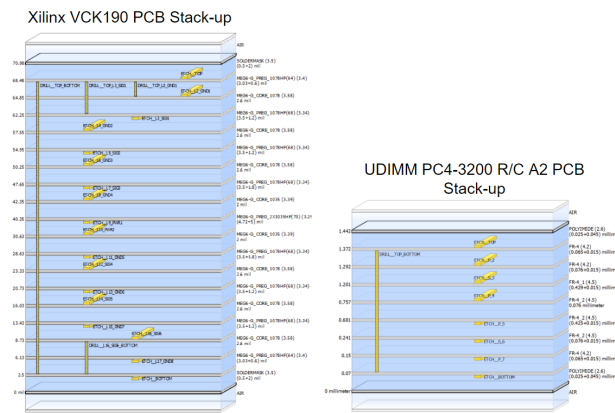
Depiction of VCK190 PCB and R/C A2 UDIMM PCB Stack-ups
